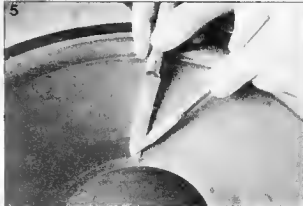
Removing the dust cap from the cone of the bass drive unit
